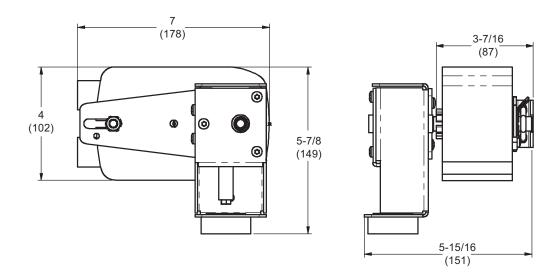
Mx40-704x-2xx Linked Actuator Assembly With AV-611 Linkage.
